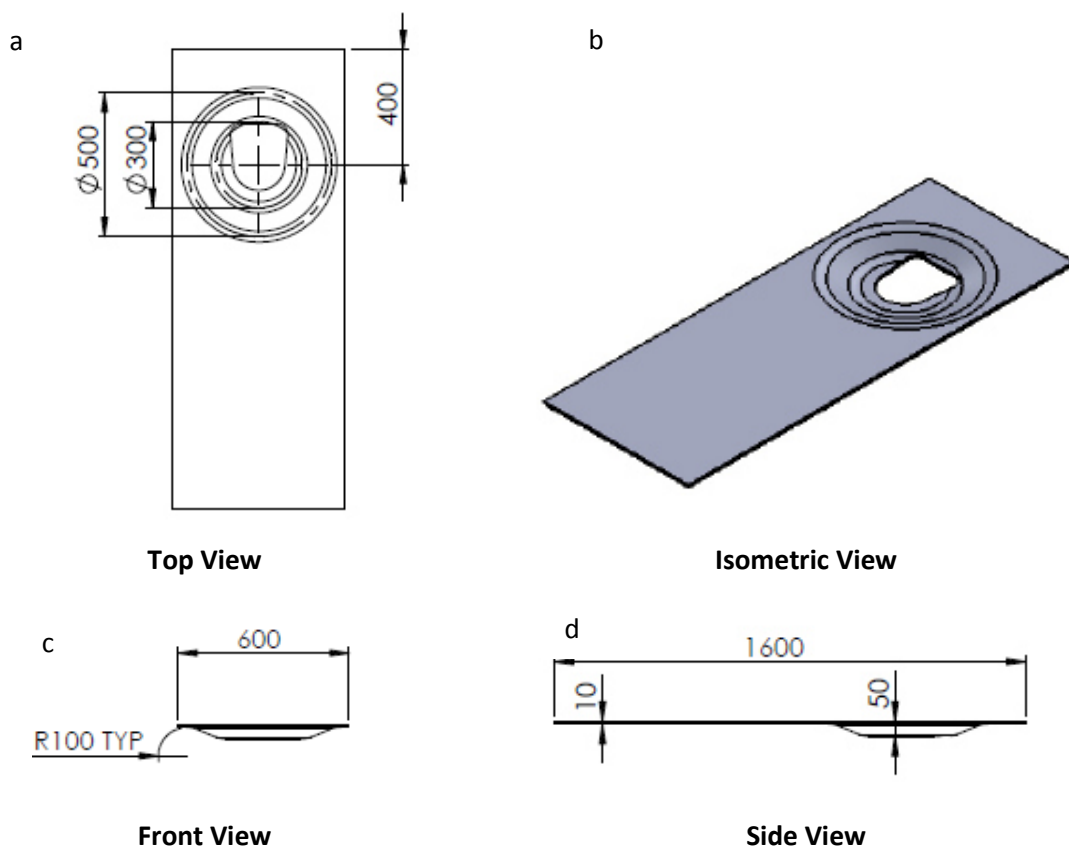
Overall dimensions of Concept 2: (a) Top view, (b) Isometric view, (c) Front view), and (d) Side view
